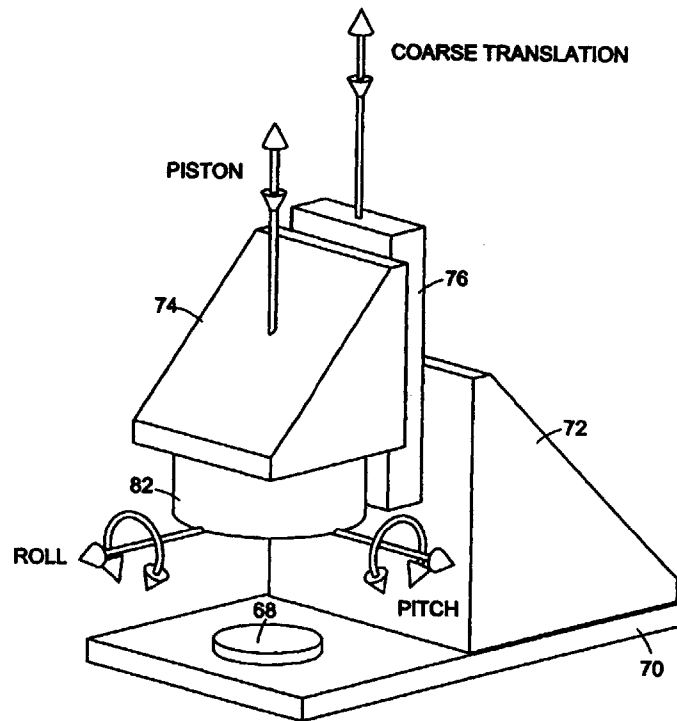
An illustration from the U.S. Patent filing of Kendale's planar microcontact printing machine [36], [37]. This machine precisely controls the roll, pitch, and height of the stamp to enable precise plate-to-plate printing. Though this form of displacement control might work for smaller wafers, it cannot be scaled up to a large area or continuous process.
